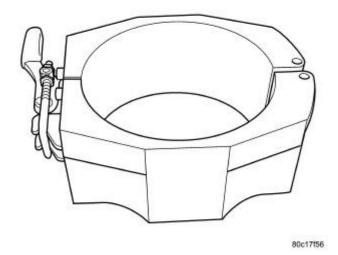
REMOVER, SEAL - VM.1058 Courtesy of CHRYSLER LLC
